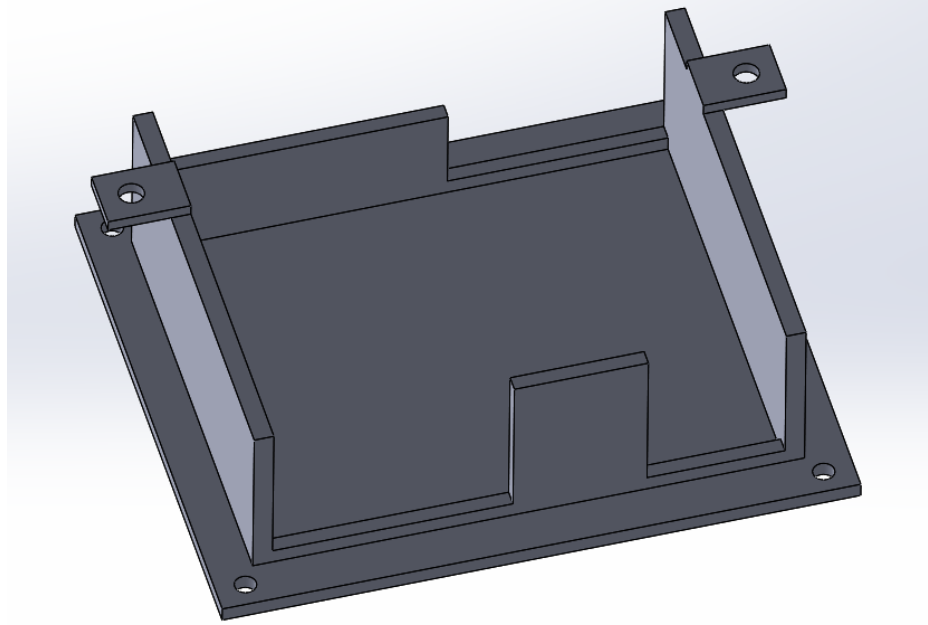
3: CAD model of the projector housing designed in Solidworks
